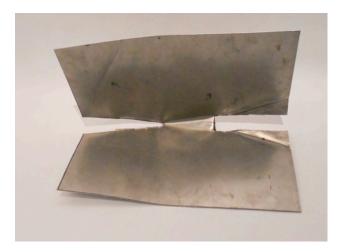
16-Gauge Carbon Steel Sheet Metal.
